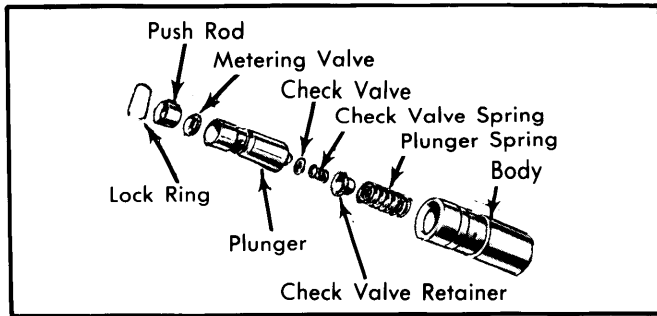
Disassembled View of Hydraulic Valve Lifter
